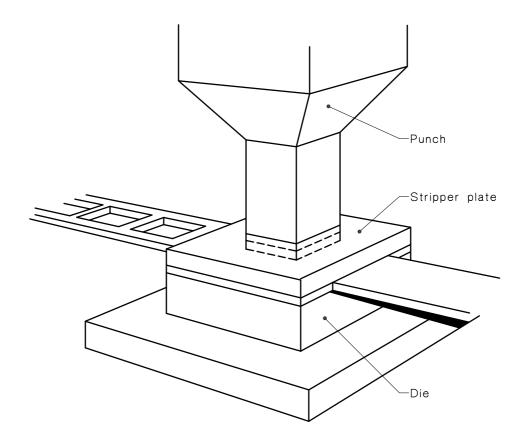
CLOSED TOOLS AT A HYDRAULIC PRESS
